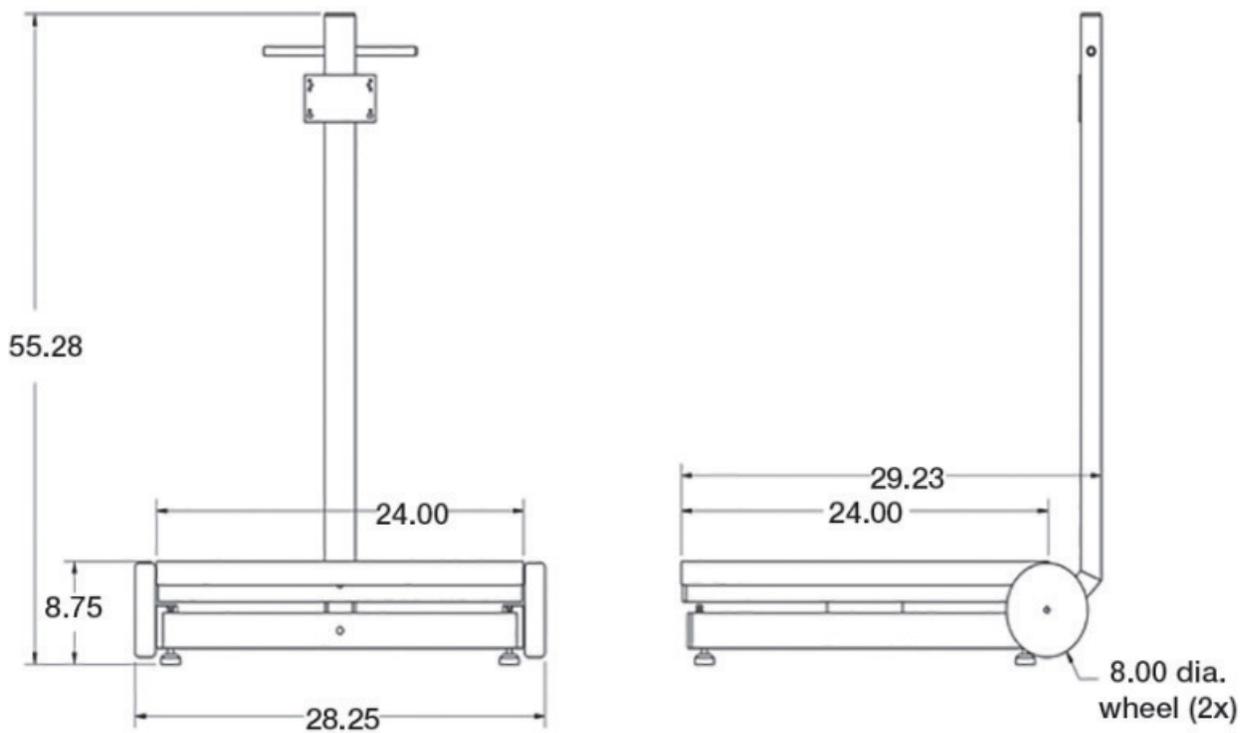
BenchMark HDP Wheel Model Dimensions (in inches)
